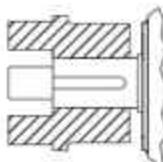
Place coupling flush with end of motor shaft and tighten setscrew.
